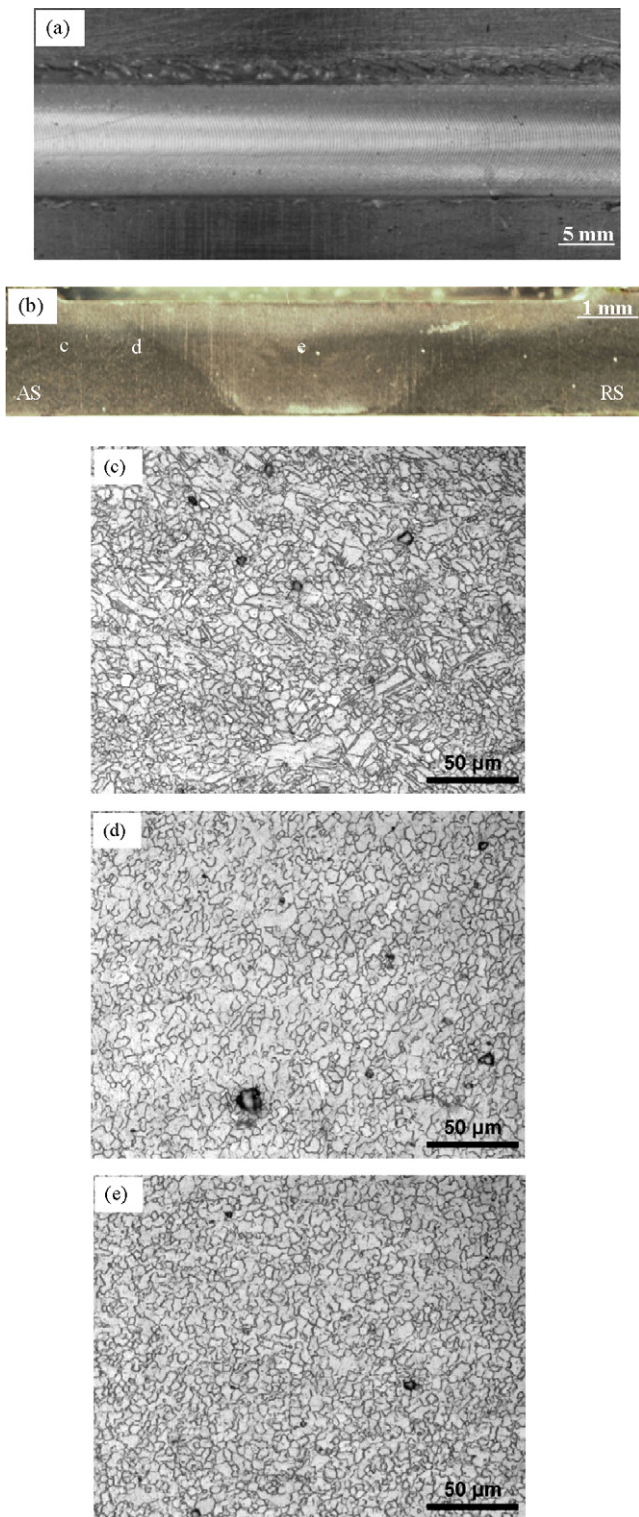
Typical macroscopic and microscopic structures of a friction stir welded AZ31-H24 alloy. (a) Top weld bead surface, (b) cross-section of the welded joint, (c) heat-affected zone (HAZ), (d) thermomechanically affected zone (TMAZ), and (e) stir zone (SZ).
